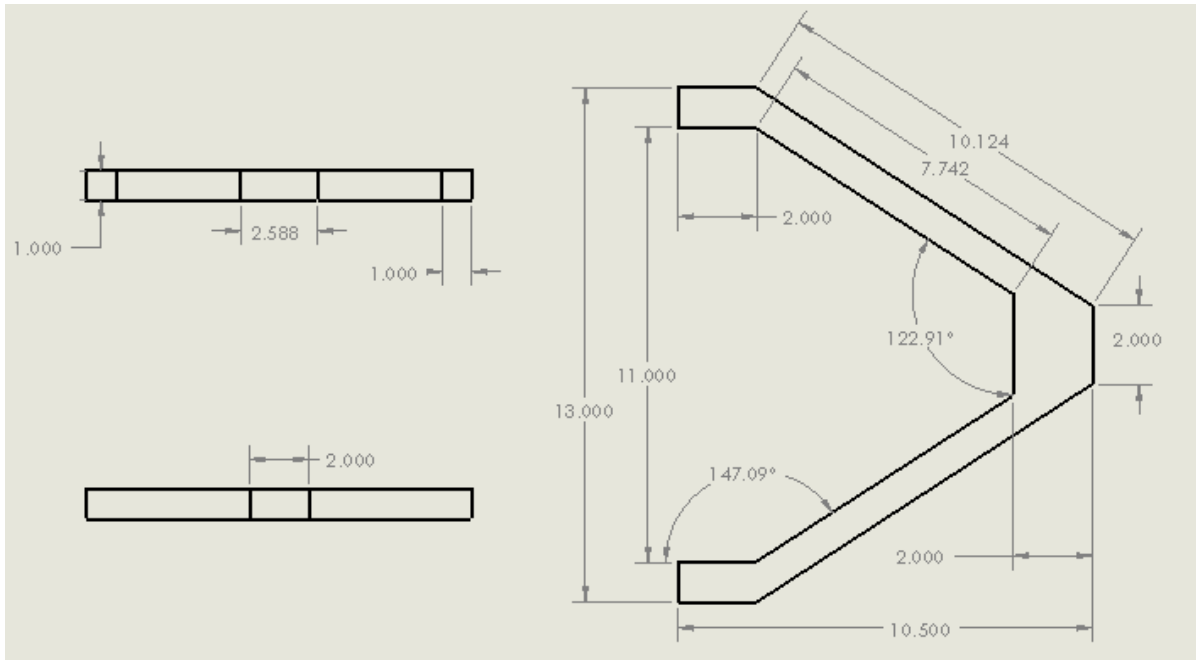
Lower Control Arm Drawing in Inches
